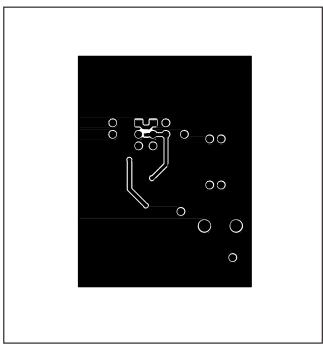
MAX4411 EV Kit PC Board Layout—Solder Side
